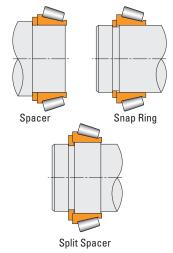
Separate member used to provide adequate shaft shoulder diameter.
